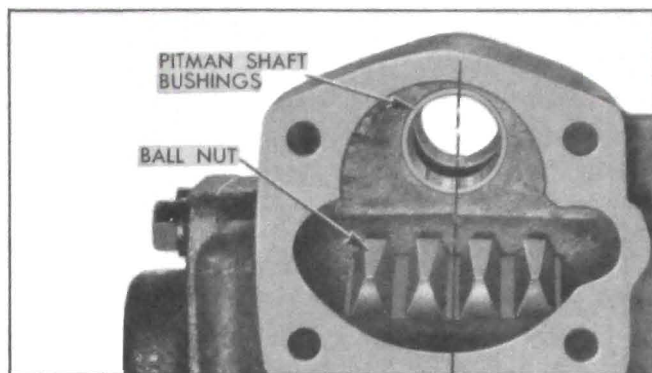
Position of Ball Nut for Installation of Pitman Shaft
